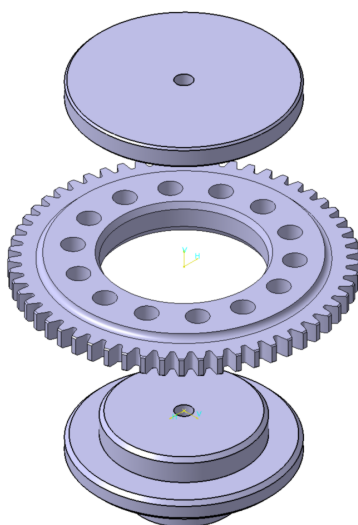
Gear support - Exploded view of the gear support and fixation cap used.
